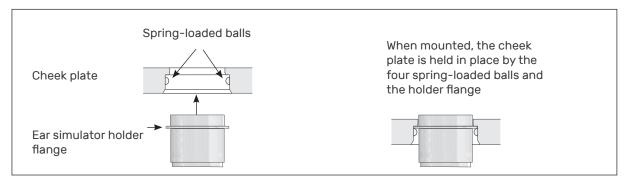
The snap fit mechanism explained. Here shown with the GR1874 Ear Simulator Holder.
